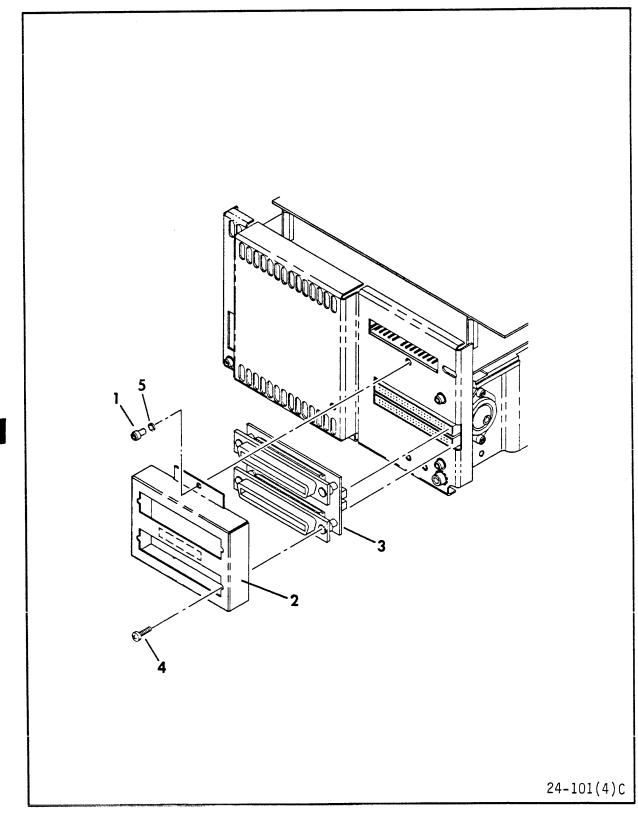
Eight-Inch Module Drive (Sheet 4)
